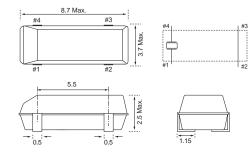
ECX-3061 - Top, Side and End views with pin connections
